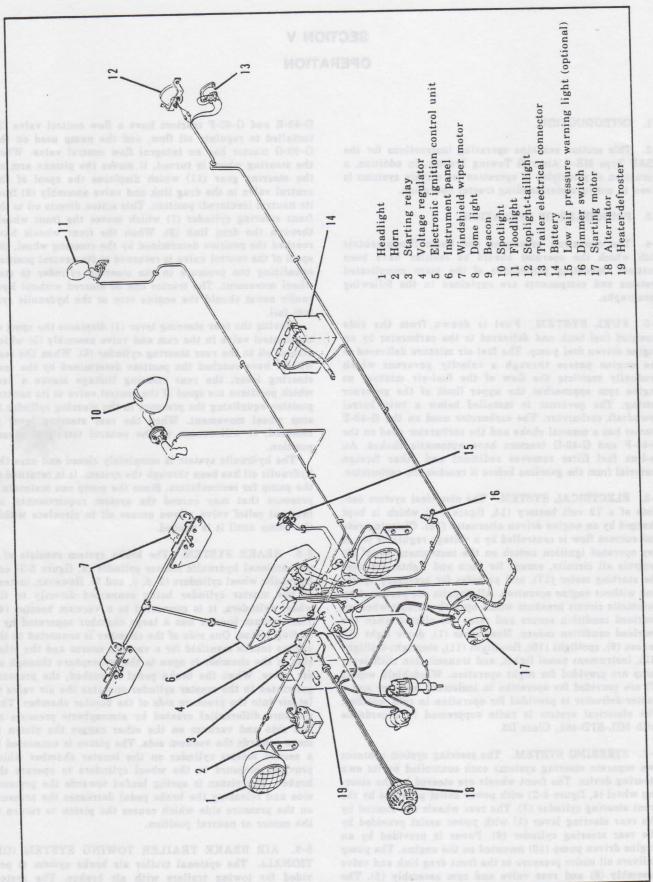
G-40-E Electrical System (Sheet 1 of 3)
